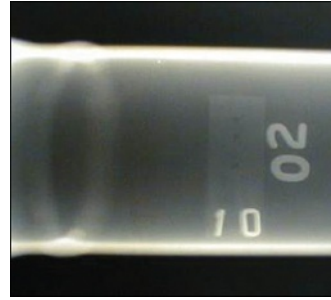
Elliptical radiographic image of a circumferential groove weld on a pipe.
